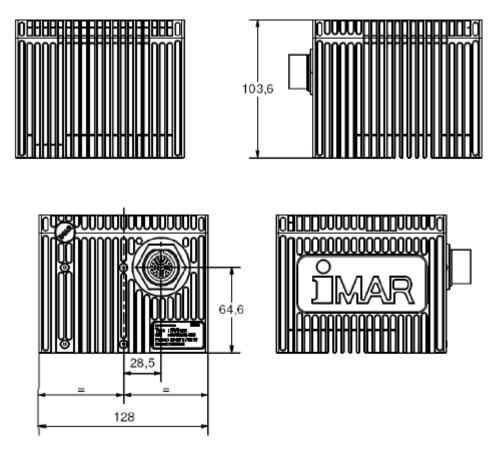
iIMU-FSAS Enclosure Side Dimensions
